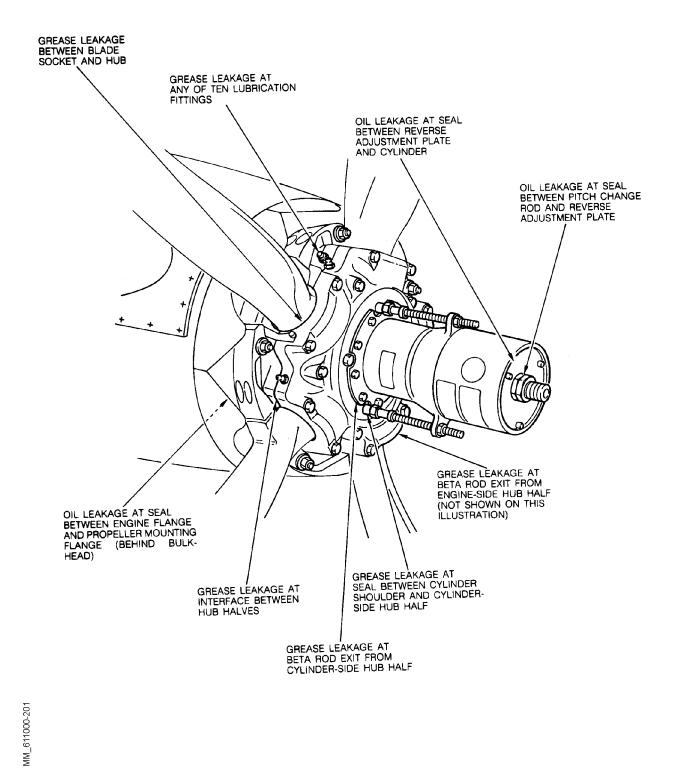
Propeller Inspection Areas for Oil and Grease Leakage
